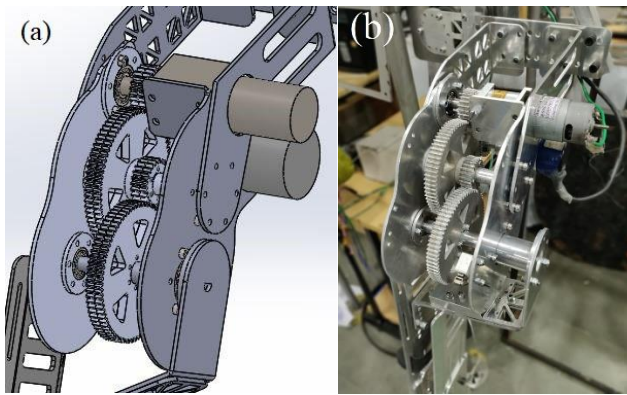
(a) CAD model of compound gearbox for hip joint (b) Actual compound gearbox for hip joint
